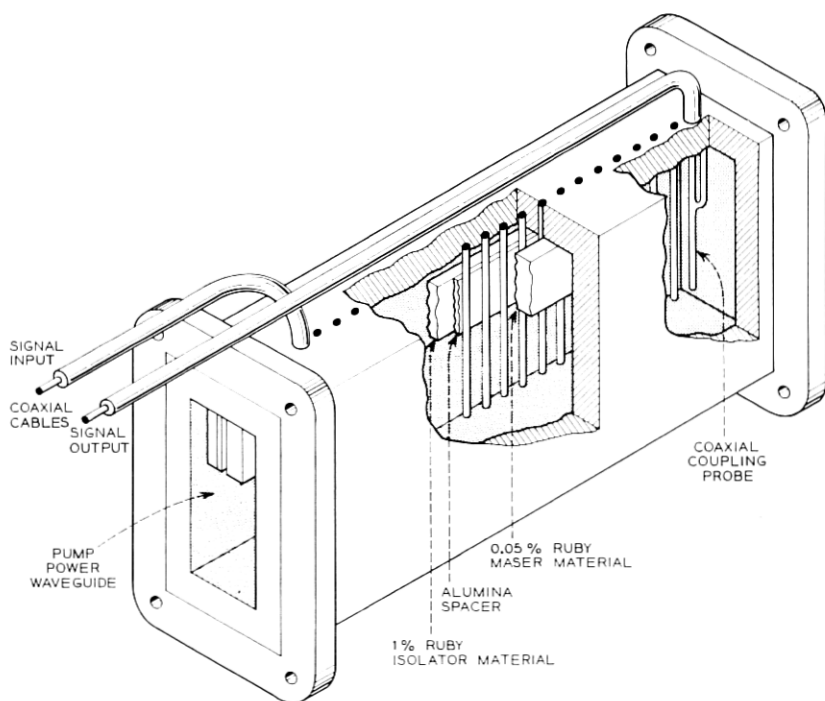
Cutaway view of full-length ruby maser assembly.
